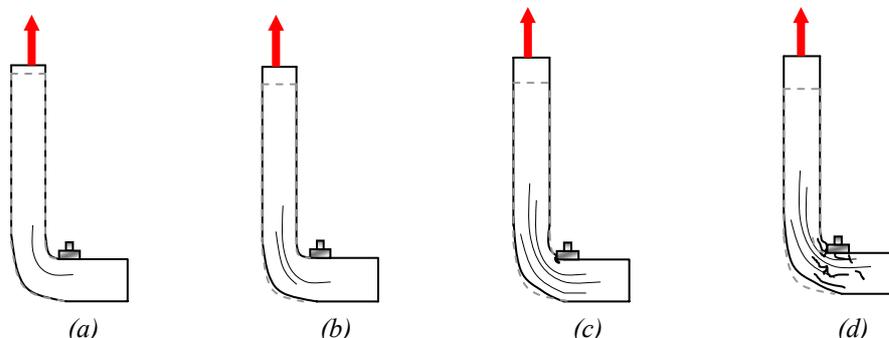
Schematic of the failure sequence of the L-Pull specimen: (a) delamination initiation at corner radius; (b) multiple delaminations through the thickness of the specimens; (c) multiple delaminations growing towards the vertical and horizontal sections of the specimens and evidence of pull-through failure; (d) straightening of the corner radius with multiple delaminations, transverse matrix cracks and evident fibre breakage.
